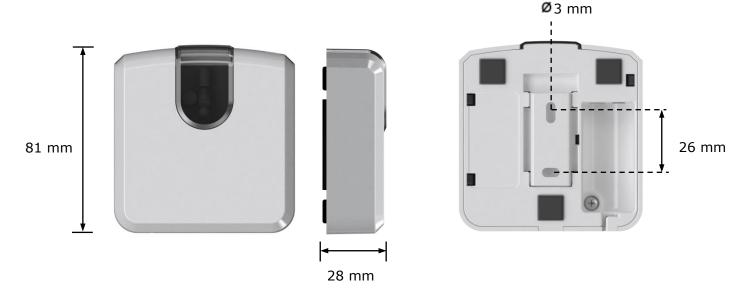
IntesisHome® device dimensions in mm and back view with fixing holes
